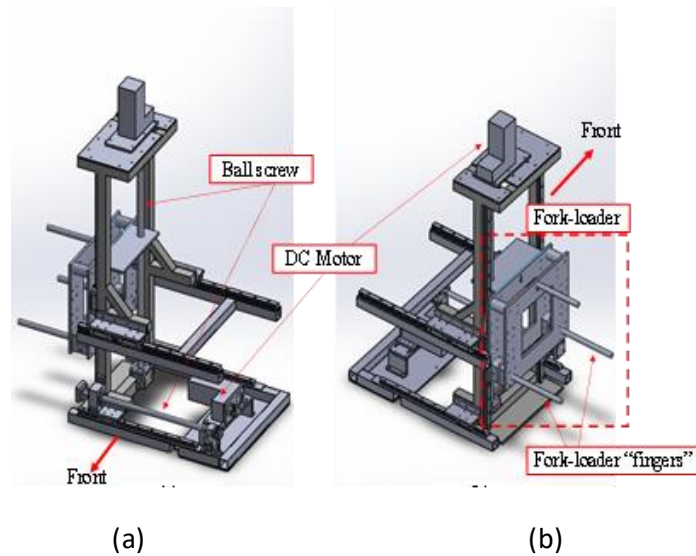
MHeLFAGV Forkloader Platform: (a) rear side view, (b) front side view
